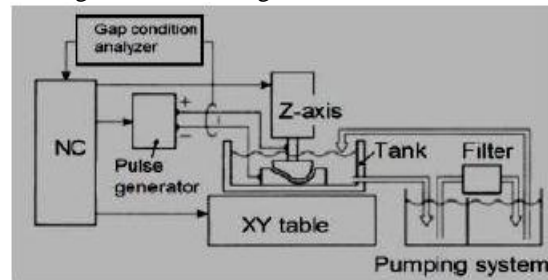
Die Sinking Electric Discharge Machine [34]
